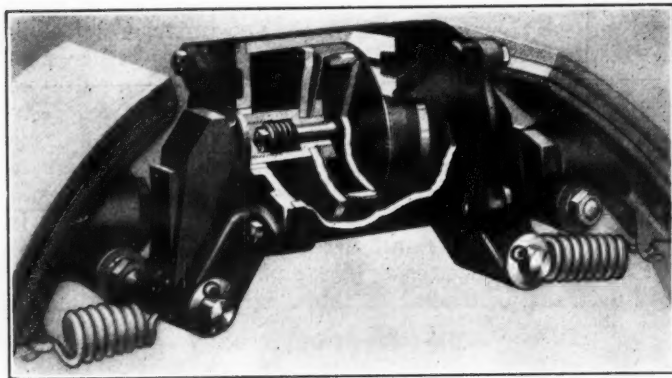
Typical brake cylinder, showing all-metal packing and means of obtaining mechanical seal
